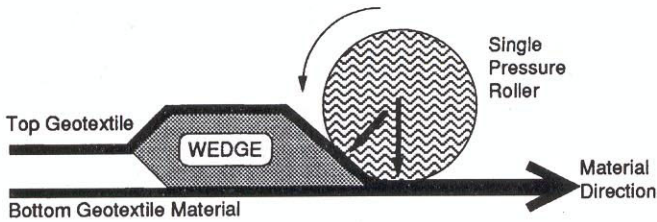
Base Pressure Roller Wedge Welding (BPR), Lippman Patented Technology
